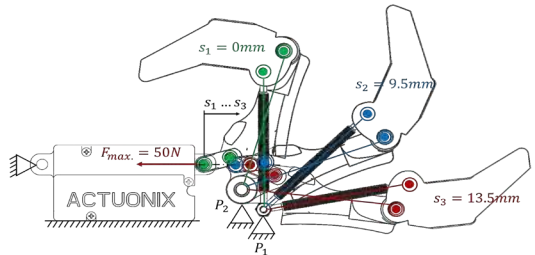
Used coupler mechanism for finger movement with a total motor stroke of 13.5mm
